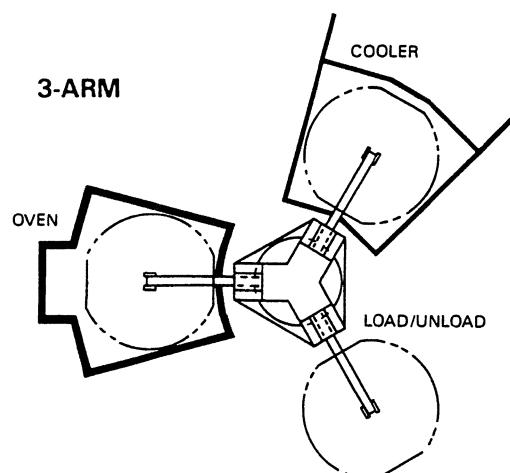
Basics of a carousel-type rotational molding machine with three stations.
